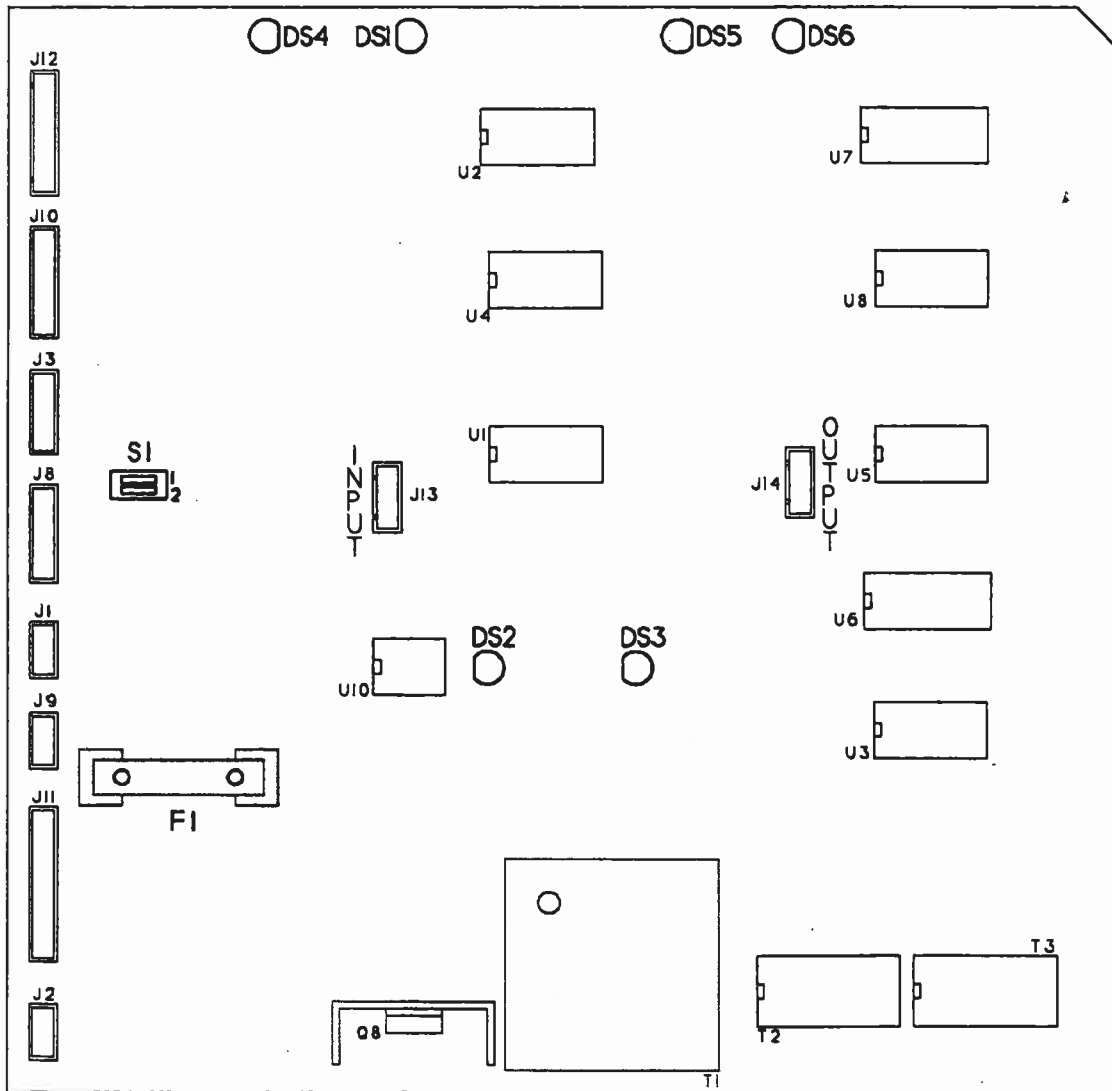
StarCut Cutter Control Board Assembly, 107451
